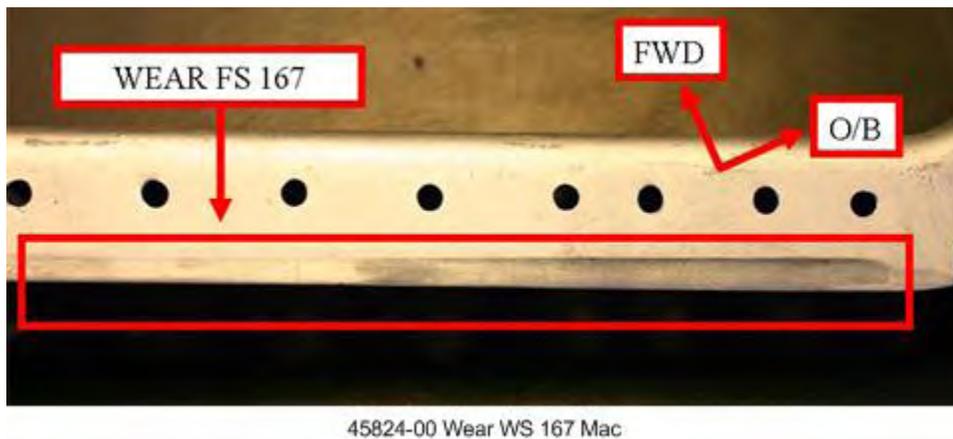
Macroscopic View of Wear on the Left Wing Rear Spar Lower Forward Angle FS 167
